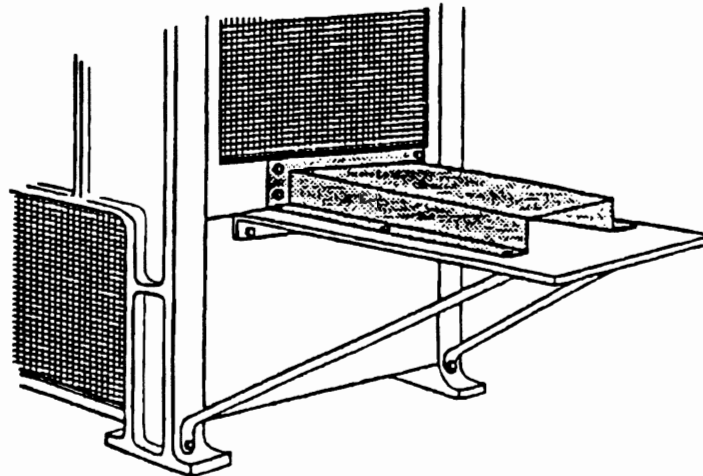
Example of a distance guard: tunnel guard providing protection at machine feed or discharge area
